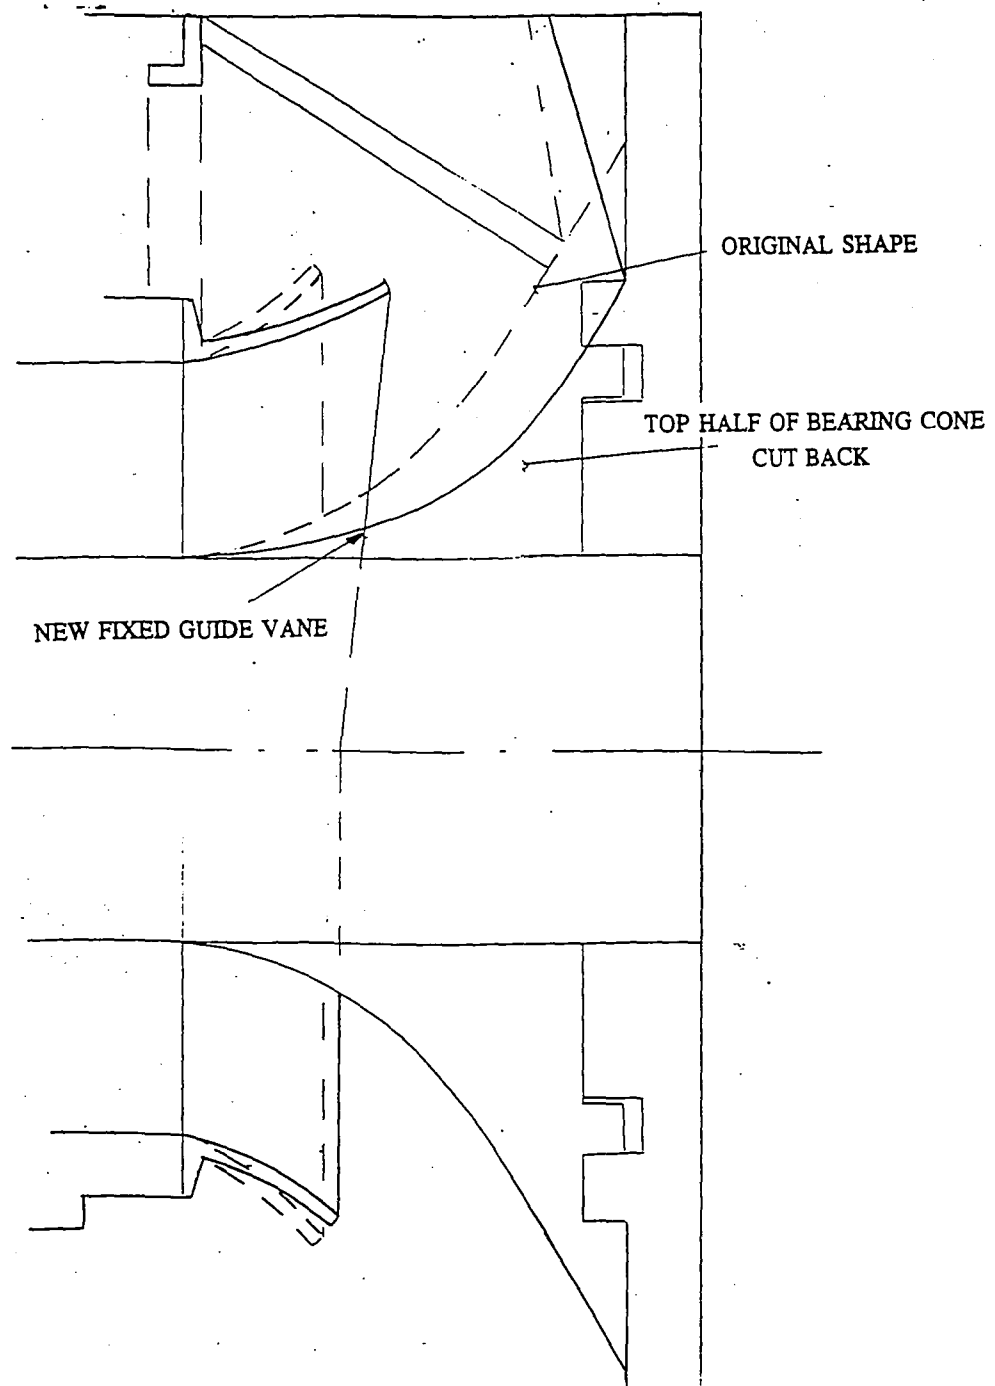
Hatfield Ferry model Modification A; (a) Elevation View
